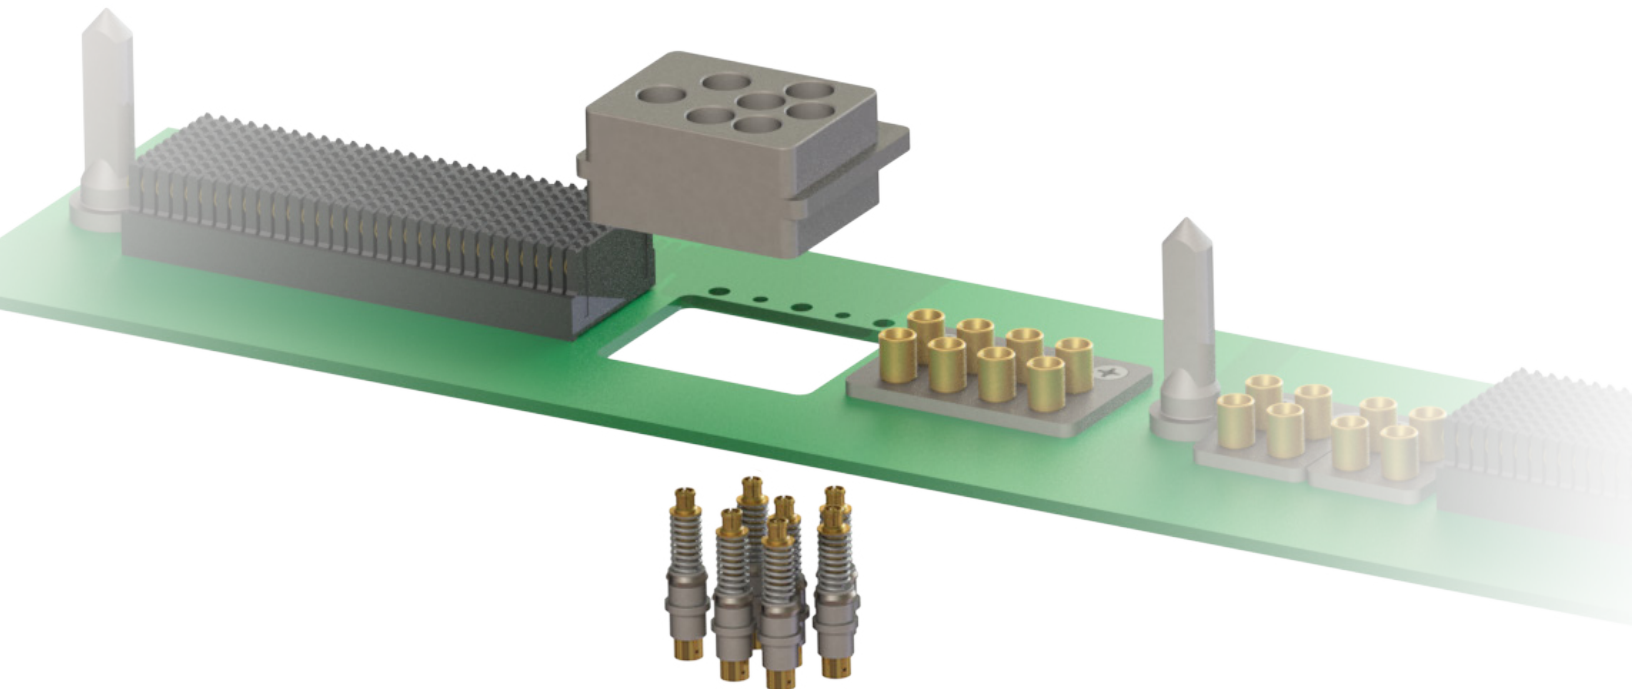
Backplane Module C exploded view with  $\varnothing$ .086 SMPM contacts shown.
